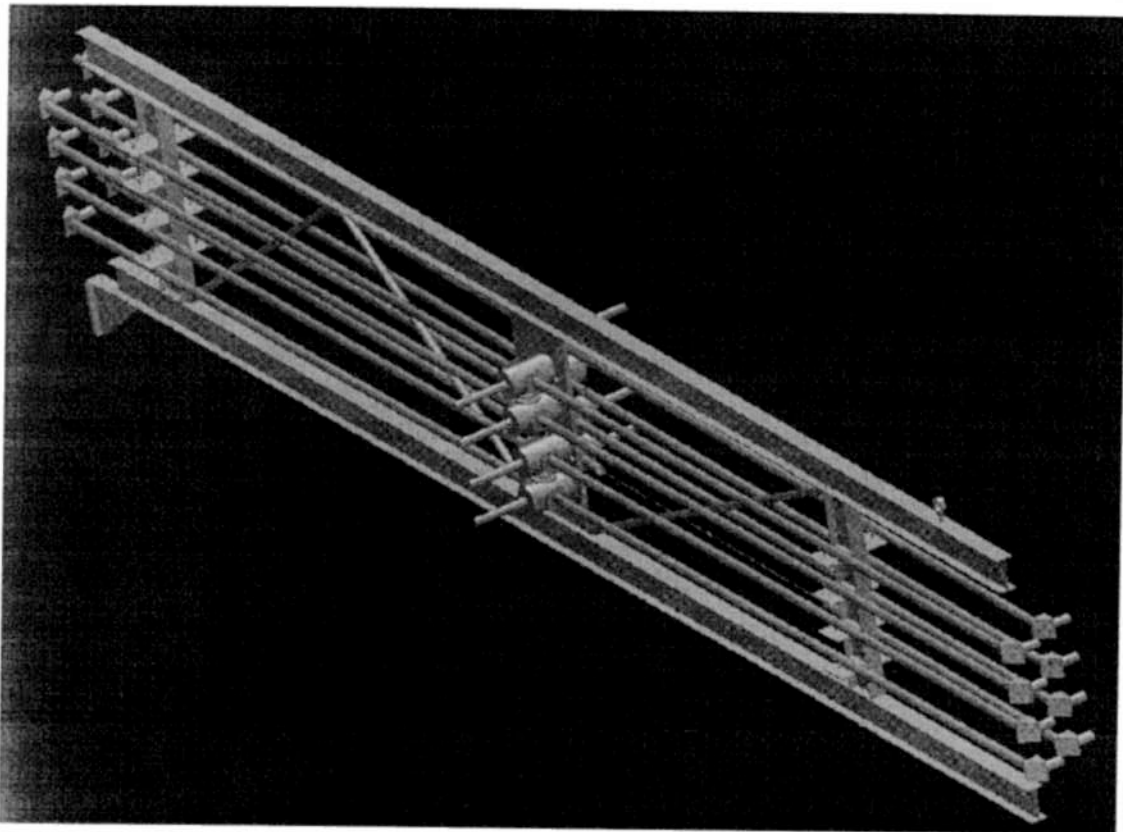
A trestle bridge structure will be used to support the waveguide from the east wall of JIT to the torus. The whole structure can be removed with in a few days for insertion of the Remote Handling Unit.
